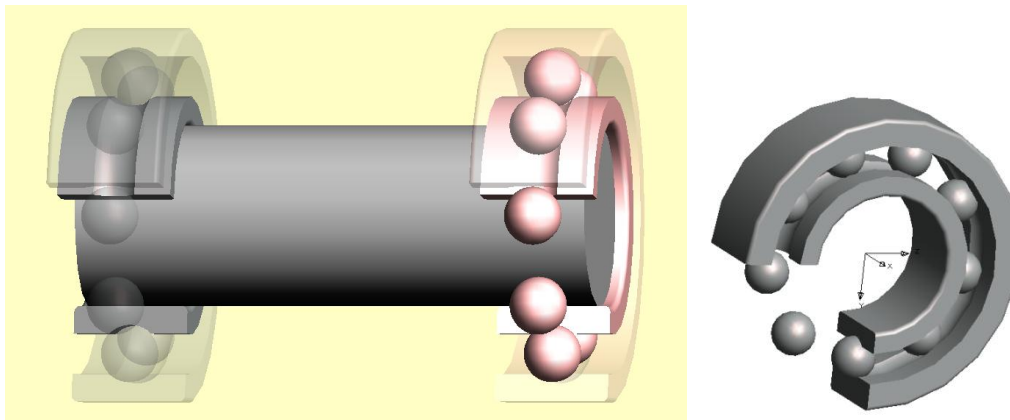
Single shaft and bearing model in Bearinx for frictional torque calculation.
